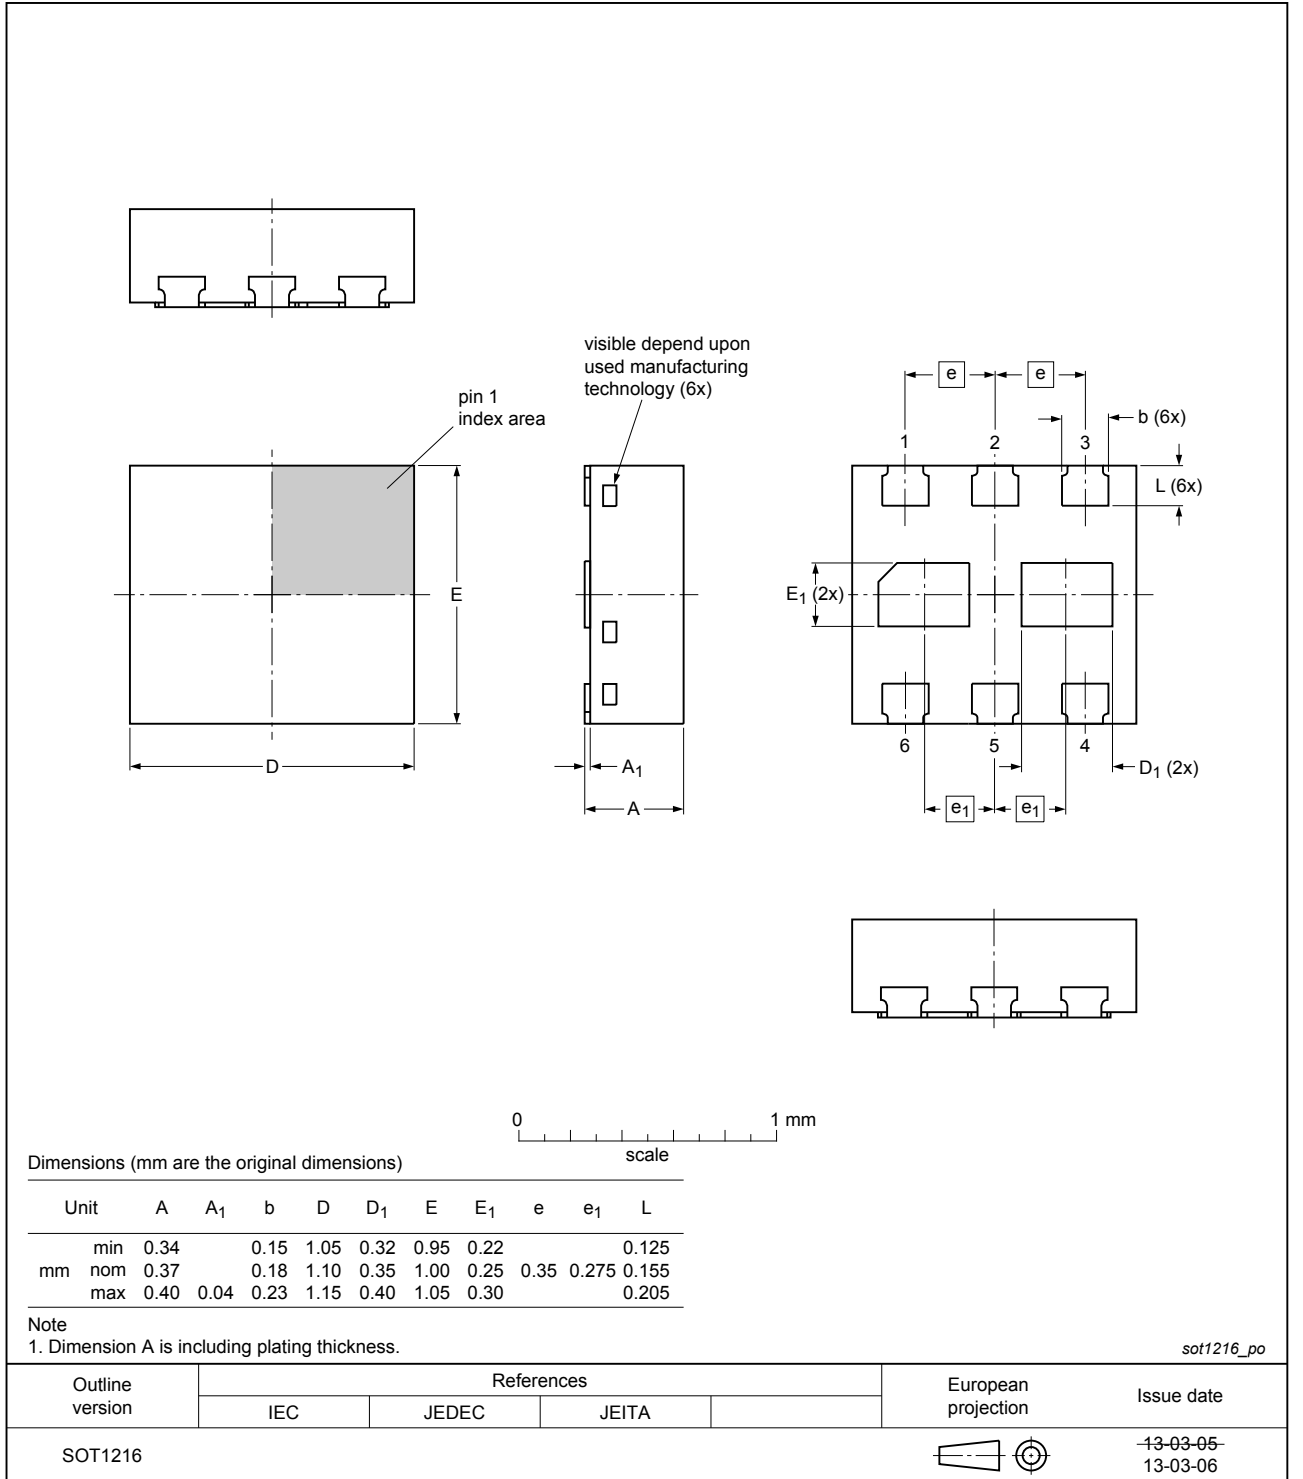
Package outline DFN1010B-6 (SOT1216)
